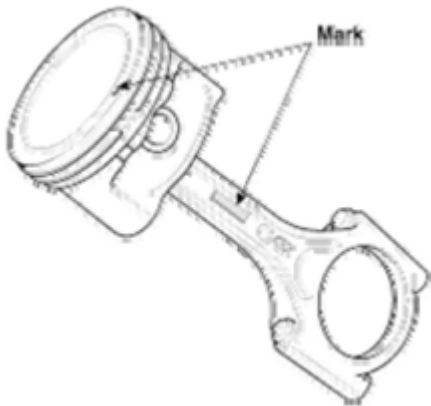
Identifying Front Marks Of Piston & Connecting Rod
